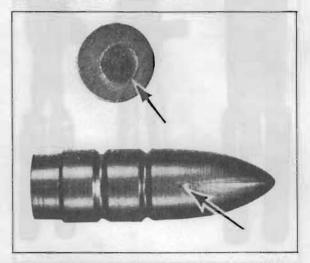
Some molds cast sprues slightly off-center (top). By marking the bullet relative to the sprue position, and loading the gun with the bullet mark always in the same position, such bullets will have the same (approximate) center of impact.
